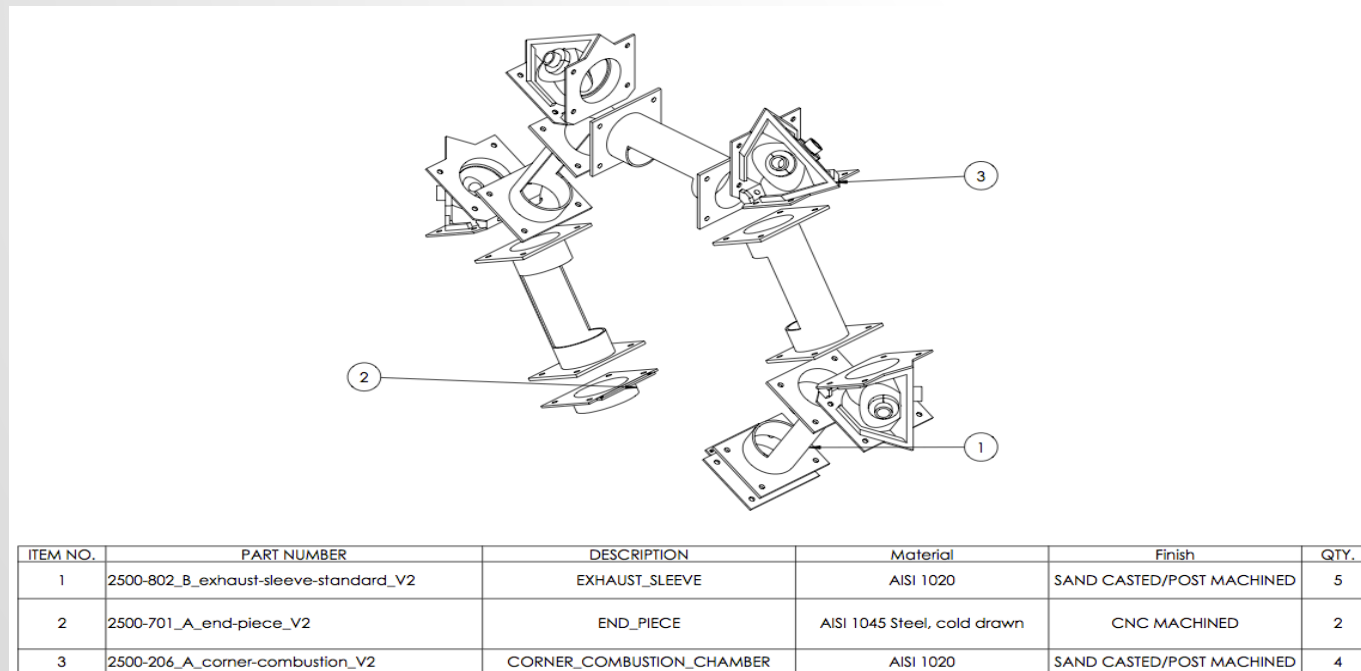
Detailed Drawing and Bill of Materials for Combustion Chamber Subassembly
